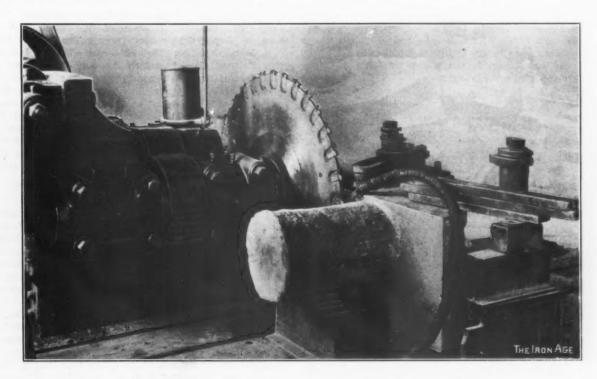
Taylor-Newbold Saw Cutting a Heavy Riser on a Steel Casting.
